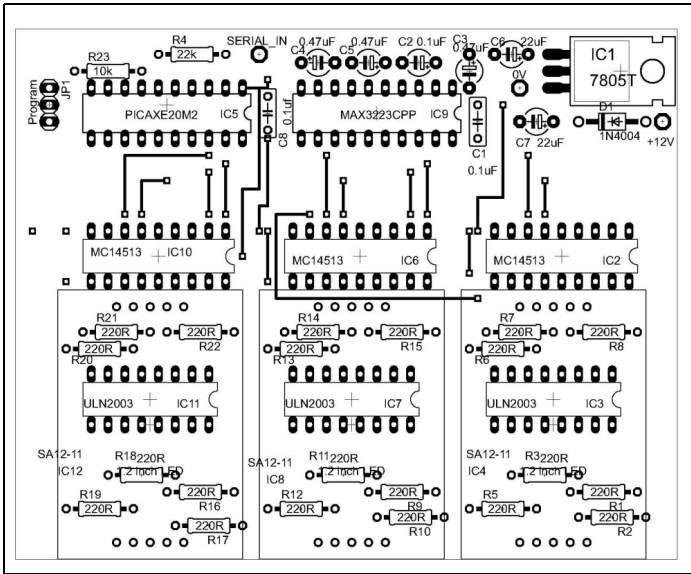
Component layout for the Display Unit. The 1.2 inch LED displays are mounted on header sockets so that they sit above the buffer ICs and limiting resistors.
